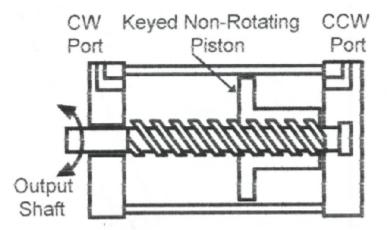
Simplified cutaway view of spiral -shaft rotary actuator.
